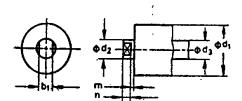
SPINDLE END WITHOUT END CAP, TYPE A
